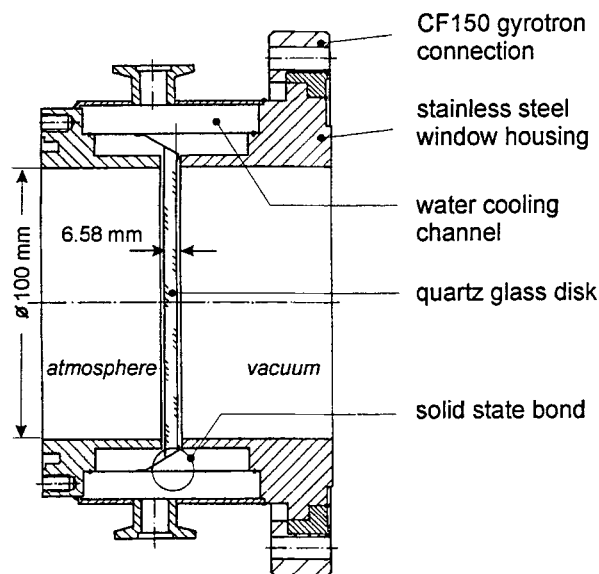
Technical drawing of the conventional edge-cooled single-disk quartz glass window.
